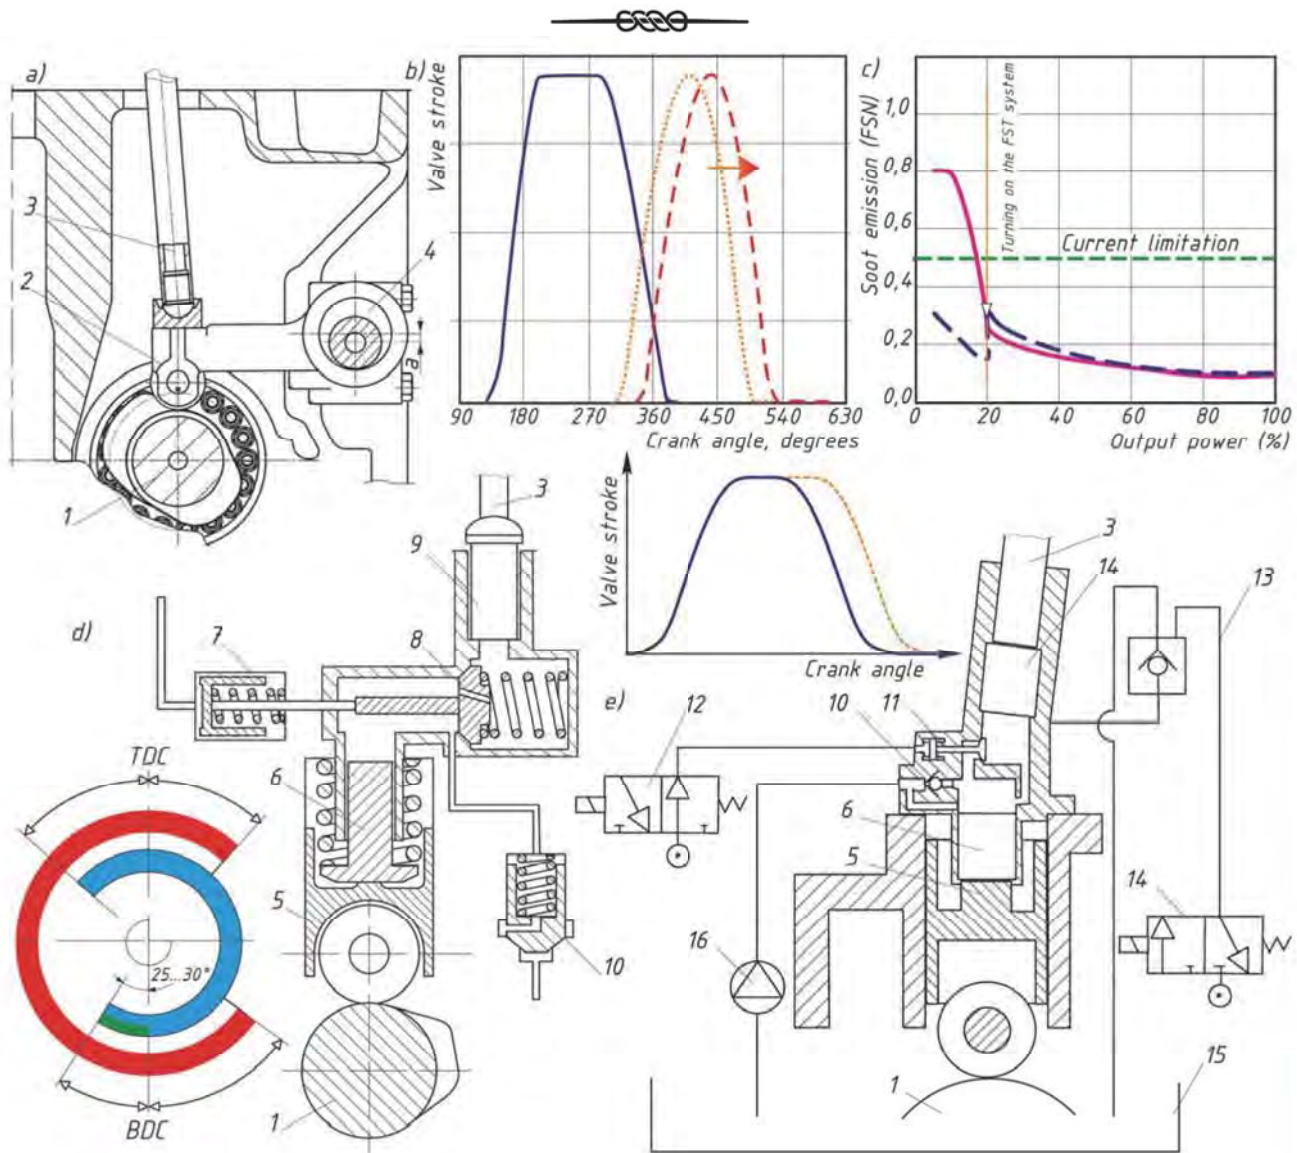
Mechanisms for changing valve timing: *a* – with movement of the lever pusher relative to the cam washer (MaK engines); *b* – change in the angles at which the intake valve begins to open and close in MaK engines; *c* – reduction in exhaust gas smoke with increasing dynamic purging phase in MaK engines; *d* – hydromechanical drive with fluid throttling of Sulzer ZA40S engines; *e* – hydromechanical drive with control valve for Wärtsilä 46F series engines: 1 – camshaft; 2 – roller pusher; 3 – rod; 4 – eccentric of the lever axis; 5 – pusher; 6 – working piston; 7 – pneumatic drive of the separation valve; 8 – separating valve; 9 – executive piston; 10 – make-up valve; 11 – control valve; 12 – control valve spool; 13 – deaeration valve; 14 – drain valve; 15 – oil storage tank; 16 – charging pump (adapted from [14, 31, 32, 33])
